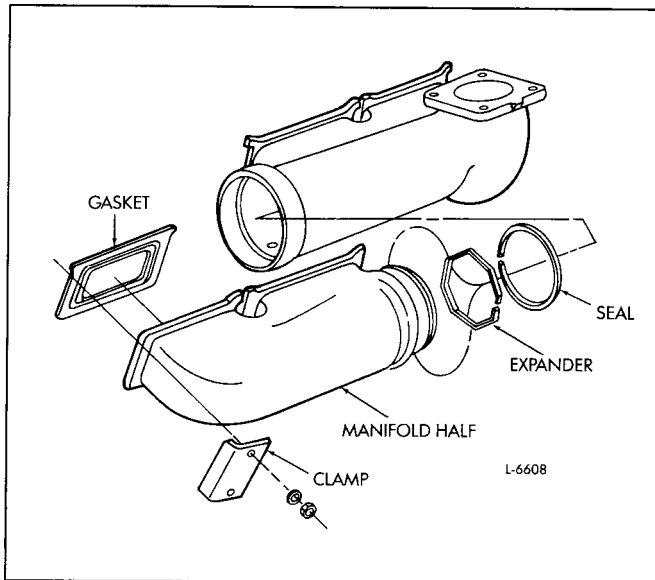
Typical Two-Piece Exhaust Manifold Mounting
